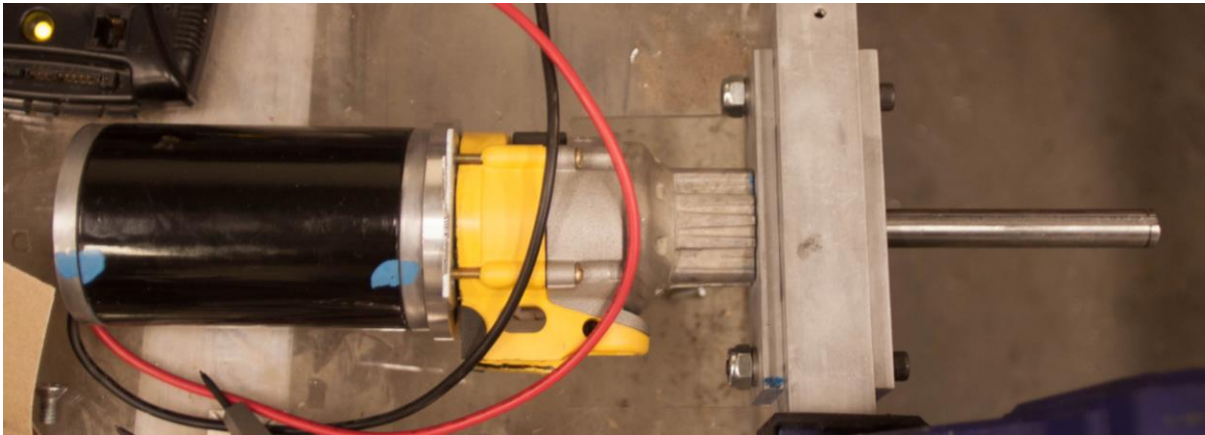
CIM motor and DeWalt XRP gearbox assembly
